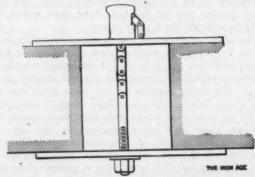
A Modification in Which the Chain-Locking Member Becomes the Head End of the Bolt.
